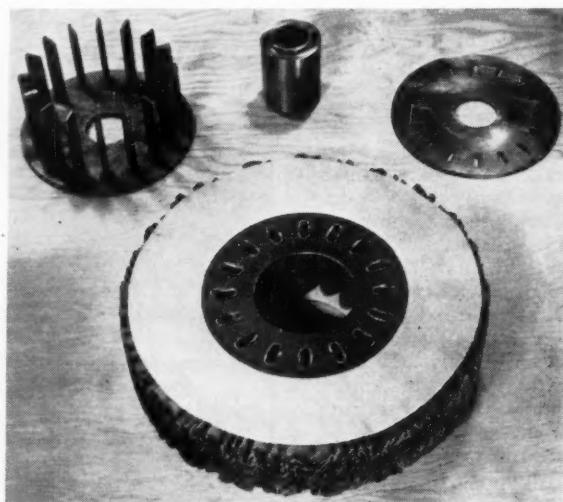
Standard Kon-Toor refill wheel parts include the cage with its 16 elliptical tubes which engage the folded packets of coated abrasives; the correct size of bushing to fit the drive spindle; and the side plate. In use, the assembly is held in place by a conventional washer and nut. Canvas side shield reduces wind and noise.
